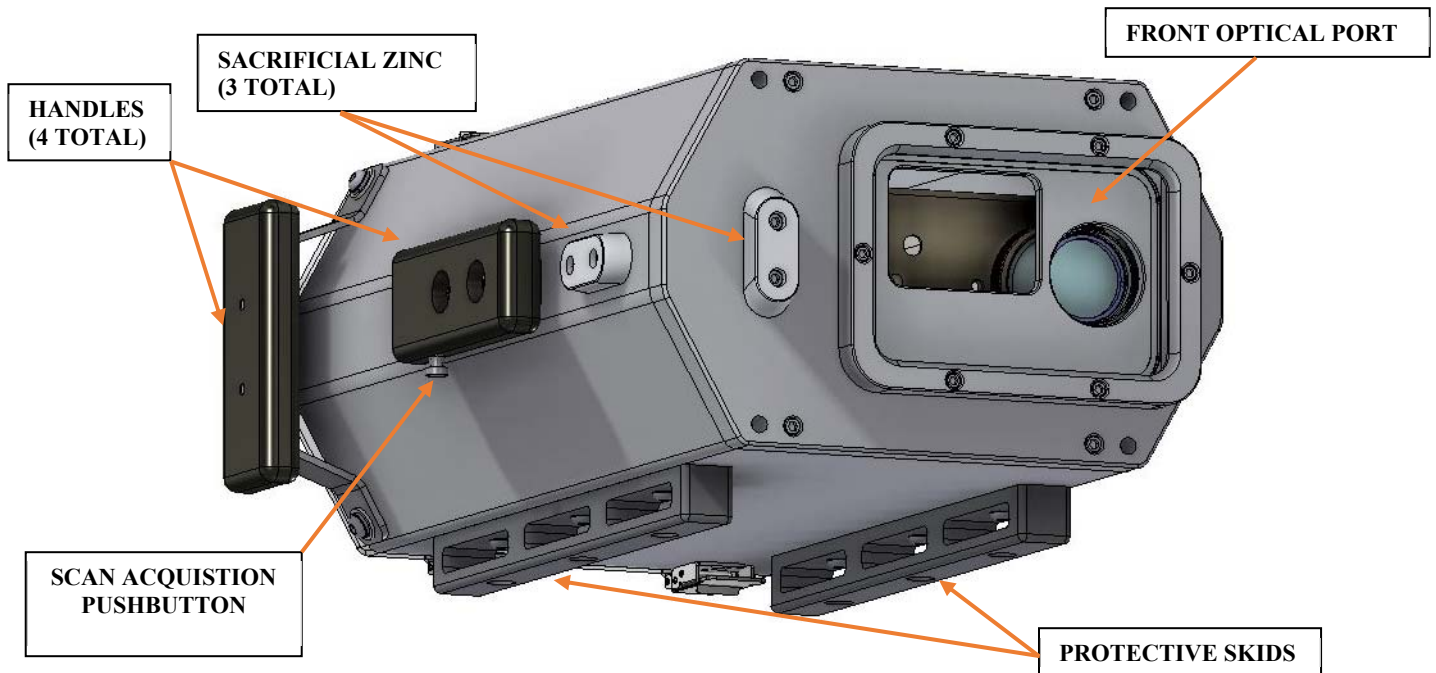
ASM512-500 & ASM1024-500 Housing, Front View
